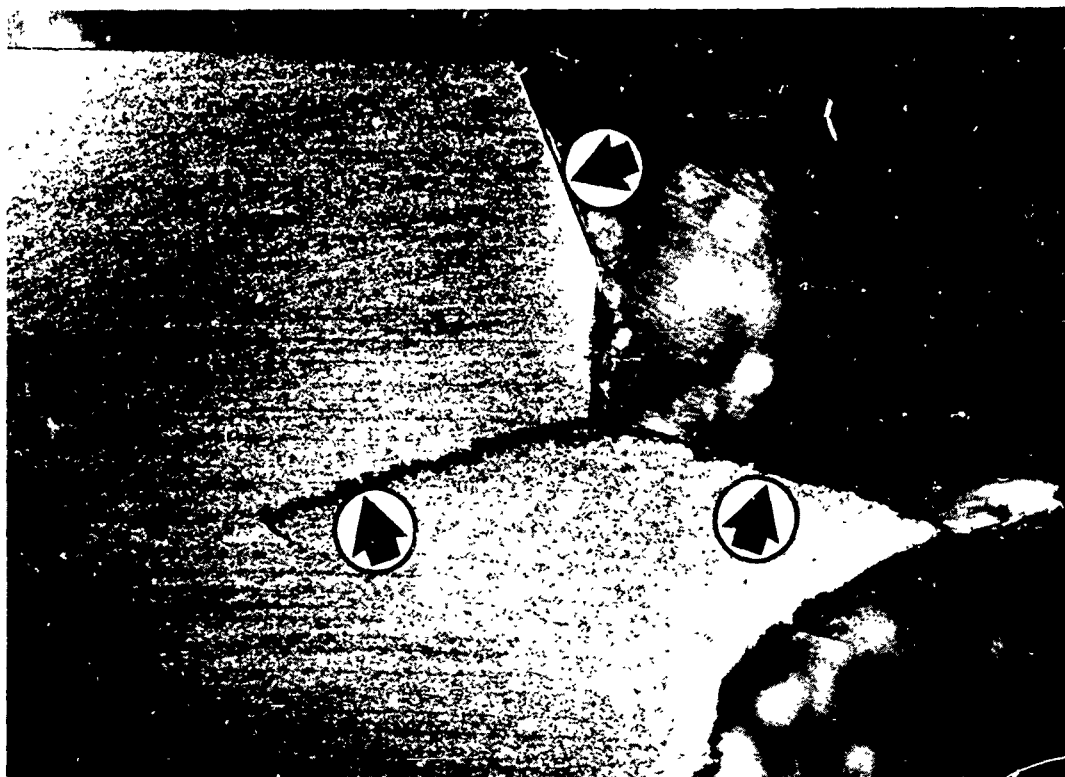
Metallographic section of specimen BL-15, dead-weight loaded for several days, showing notch (top arrow), fatigue crack, and secondary cracks (two bottom arrows). 5X.
